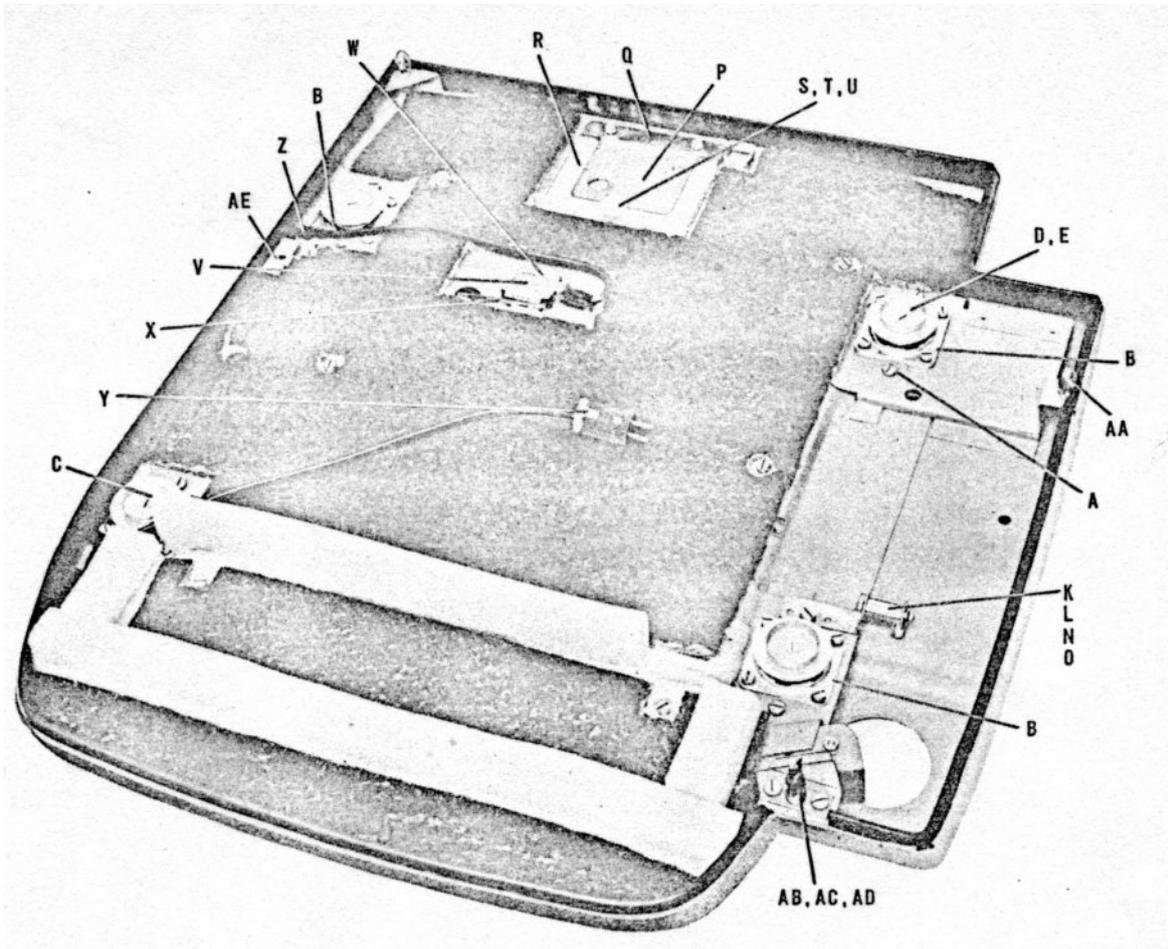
BASE ASSEMBLY (TOP VIEW)
